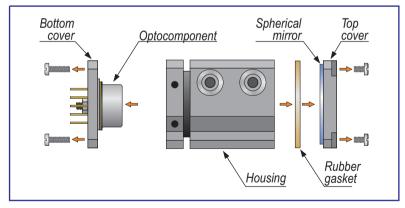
DX6106 Optical Unit disassembling illustration
